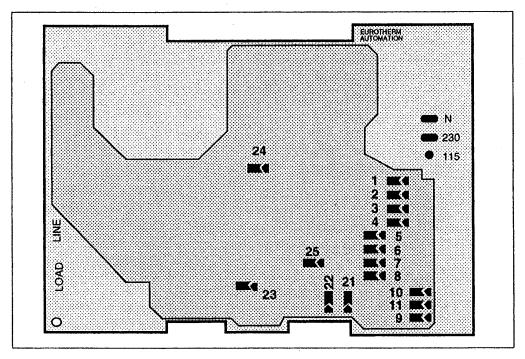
'Type 2' board. 'Coffee bean' links location (soldered side view)
